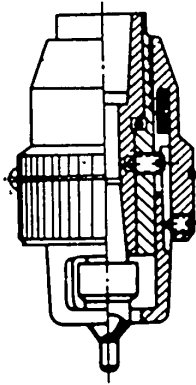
Countersinking Attachment Mounted Directly to the Spindle of Hand Drills or Drill Presses (Countersinking Chuck)
